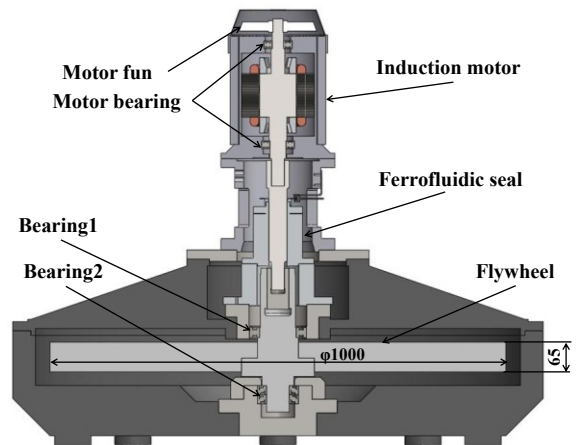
Configuration of a prototype flywheel system that employs the general purpose motor and ball bearings.
